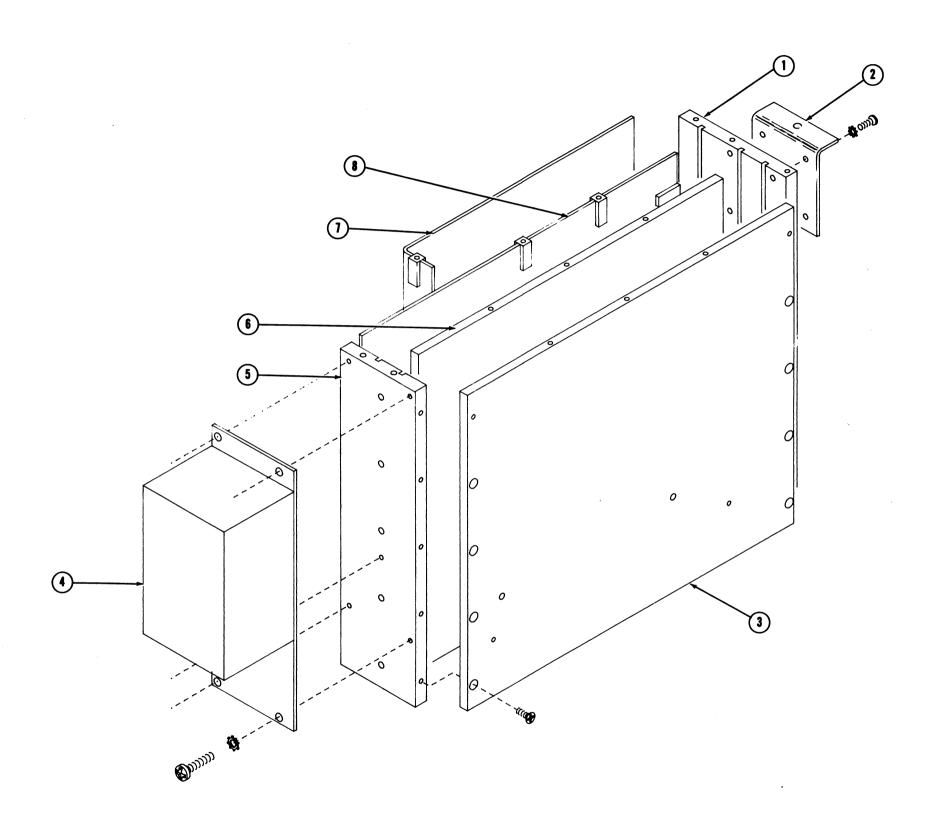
Tracking Generator/Oscillator Assembly 9-105/9-106
